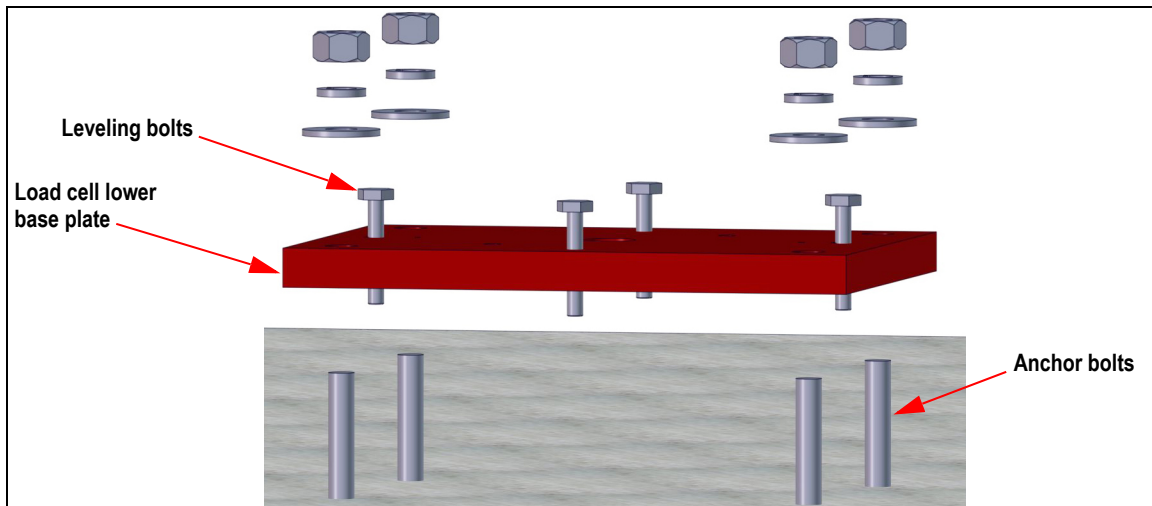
Leveling Bolts Installed into Lower Base Plate
